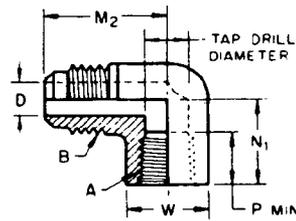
90 DEG INTERNAL PIPE THREAD ELBOW
